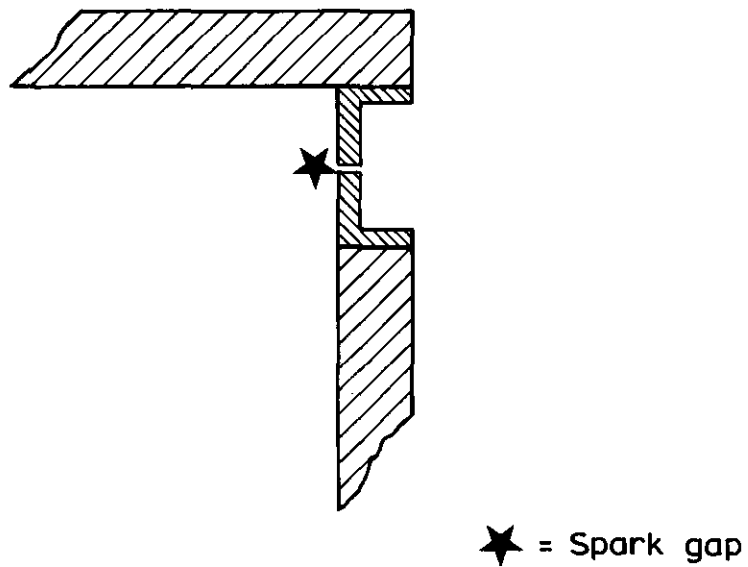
FLANGE LOCATING DEVICE FOR THE
